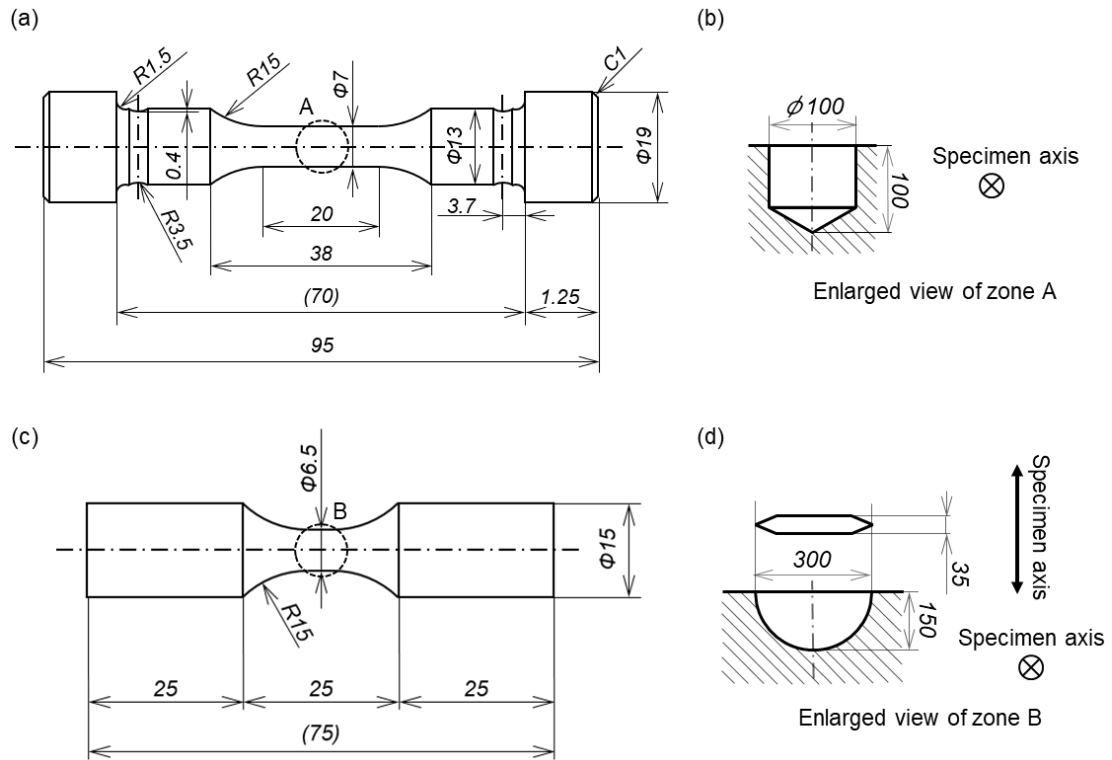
Shapes and dimensions of: (a) drill-hole specimen for the push-pull fatigue test (in mm); (b) small, drill-hole (in μm); (c) EDM-notch specimen for the torsional fatigue test (in mm); (d) small, semicircular EDM-notch (in μm).
